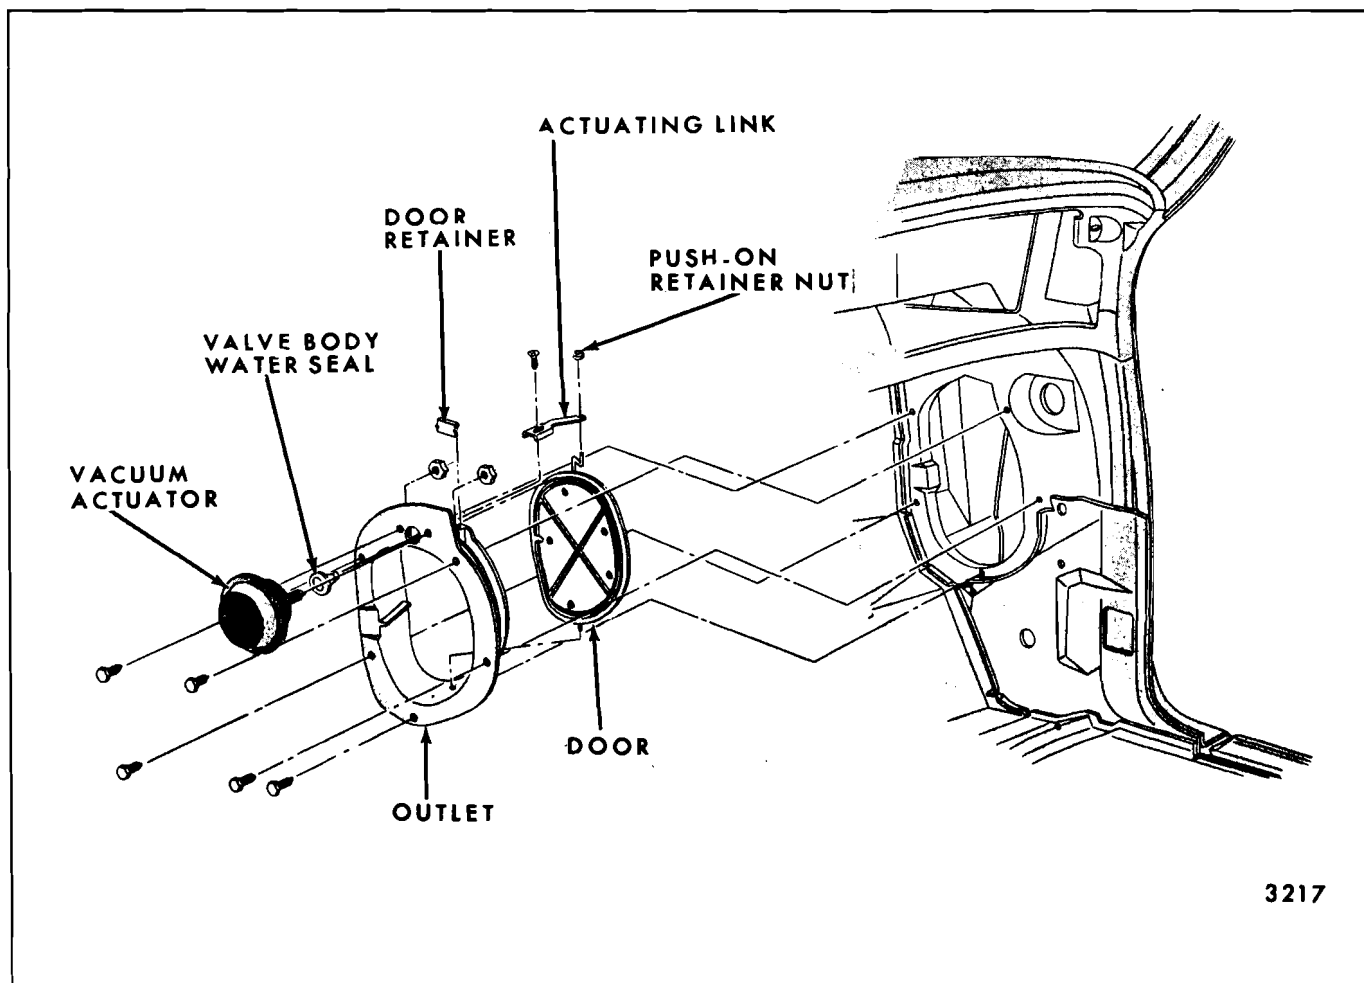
Shroud Side Air Duct Outlet and Door - Buick & Cadillac “E” Styles
